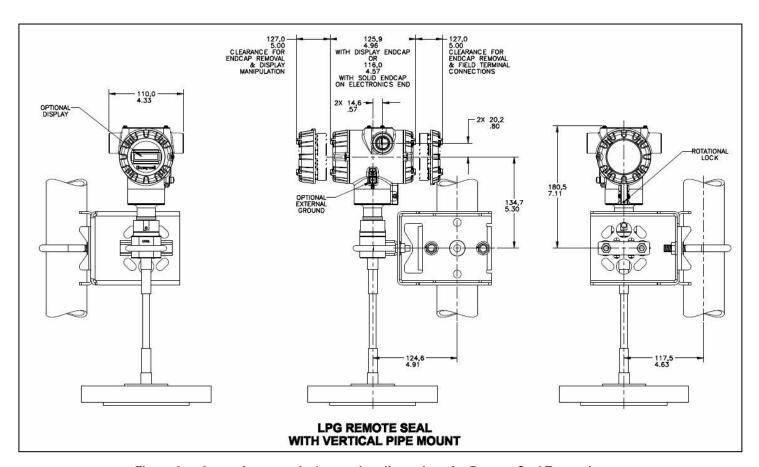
Approximate vertical mounting dimensions for Remote Seal Transmitter
